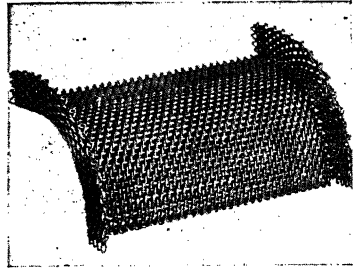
Woven wire conveyor with turned-up selvage edges, which can be used for small pieces.
